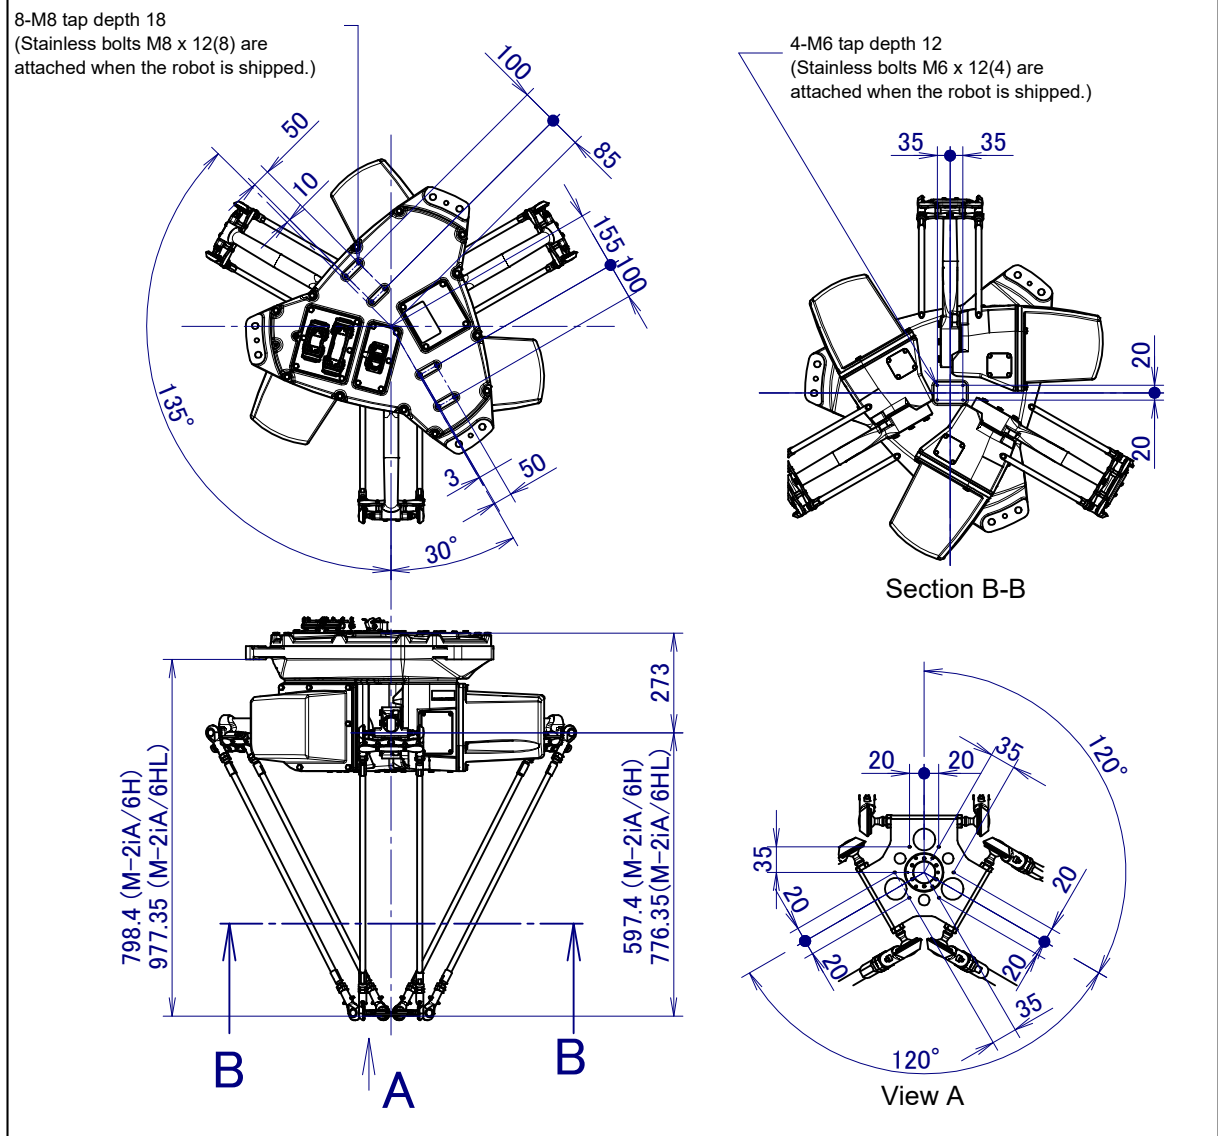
(c) Equipment mounting faces (M-2iA/6H/6HL)
